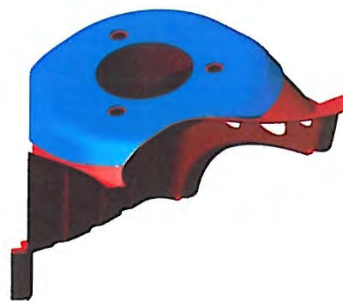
50.1 3120 Shock tower assembly (RH)
